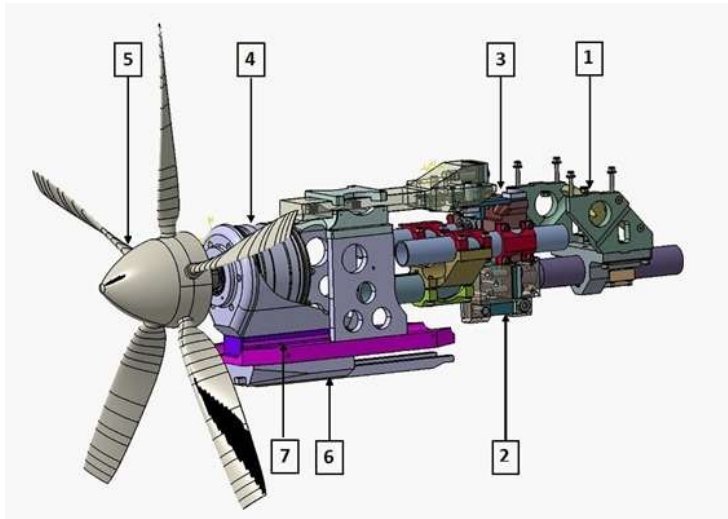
Uncovered nacelle: (1) Wing mounting, (2) Yaw attachment, (3) Pitch attachment, (4) Motor, (5) Propeller, (6) Movable weight, (7) Thrust measurement cell.
